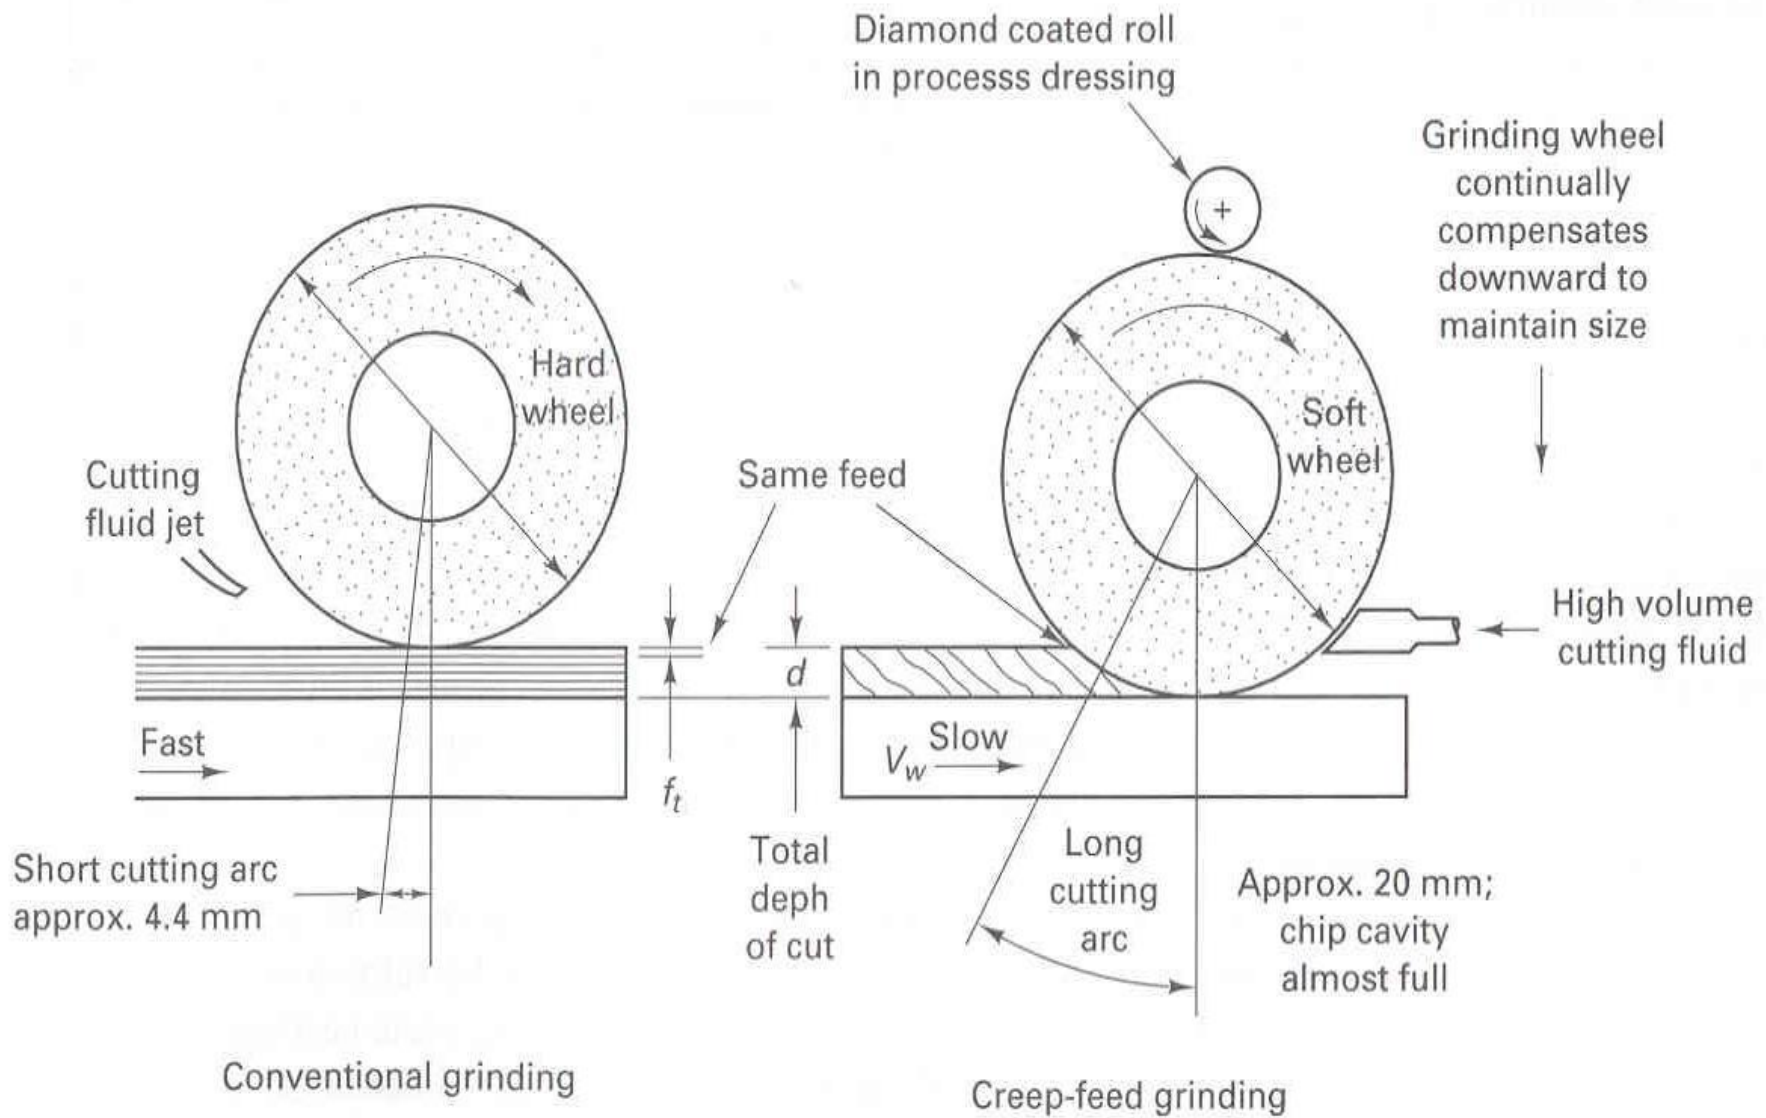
Conventional grinding contrasted to creep feed grinding. Note that crush roll dressing is indicated.
